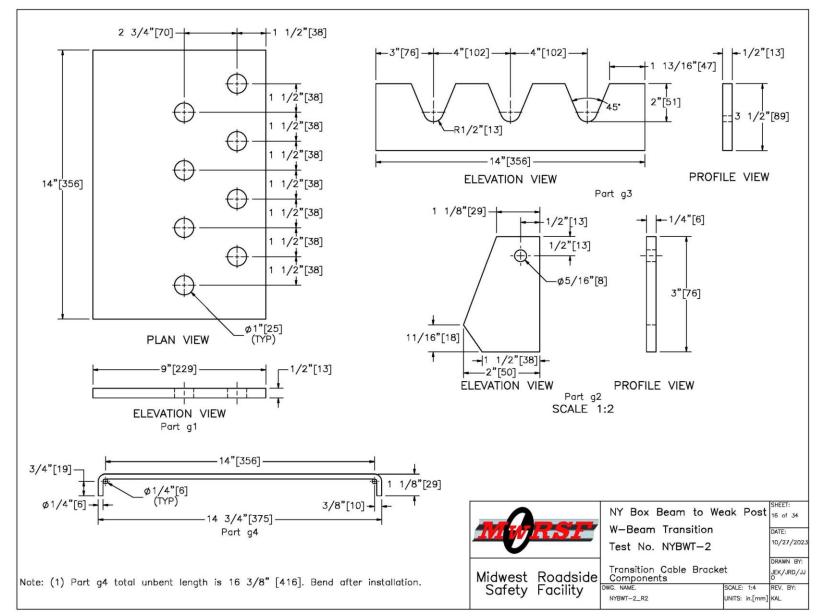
Transition Cable Bracket Components, Test No. NYBWT-2
